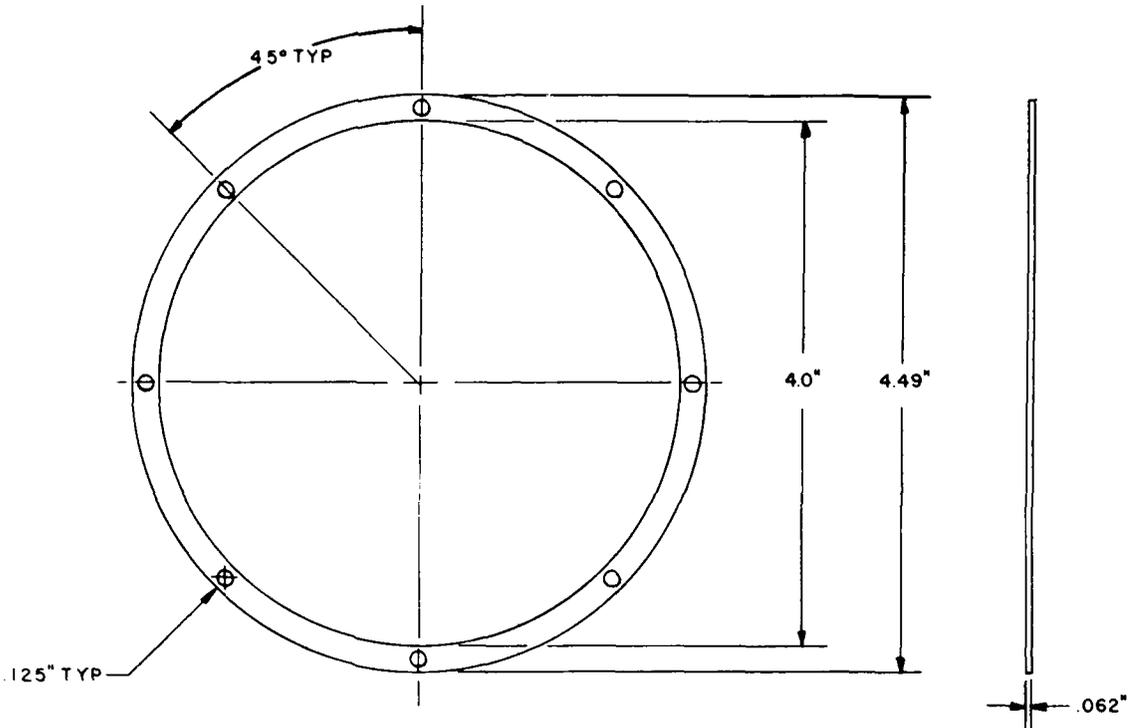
(Continued) — FSM laser tube; unless otherwise specified, tolerances are  $\pm .002$
